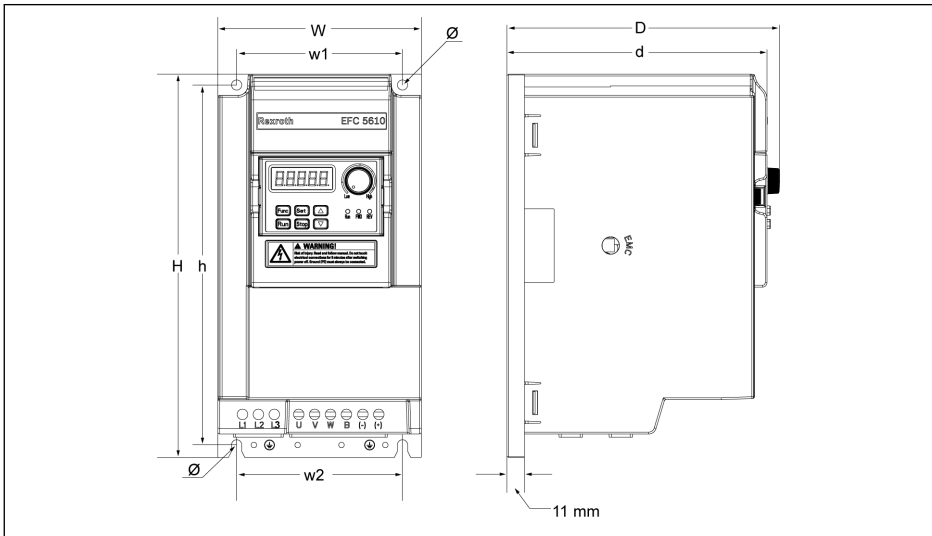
EFC 5610 5K50...15K0 dimensions figure (cold plate models)
